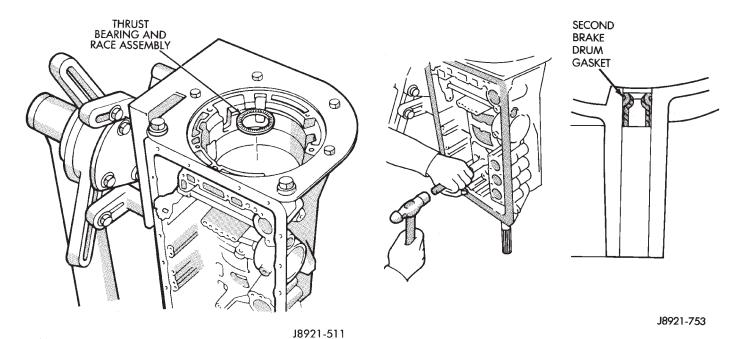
Removing Planetary And Brake Drum Thrust Bearing And Race Assembly
